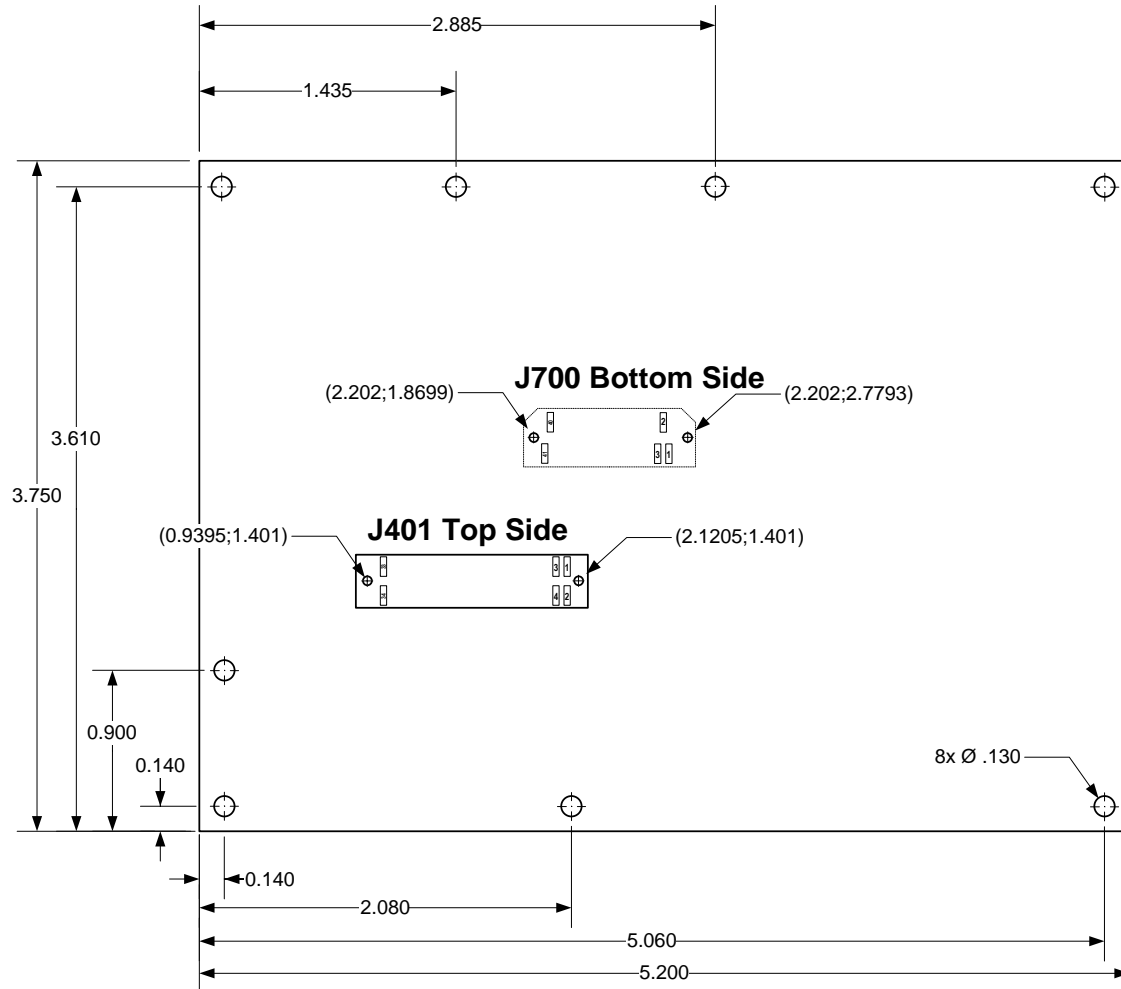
MityARM-335x Development Kit Outline, Mounting Hole Locations, Hirose DF9-41P-1V(32) expansion header J700 and Molex 87832-3420 LCD header J401 (Top View, inches)
